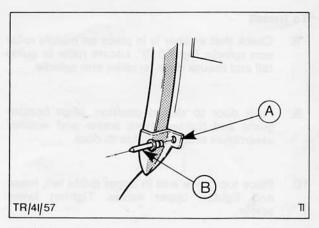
Flanged retainer and 'pop' rivet (lower end front door aperture weatherstrip)
